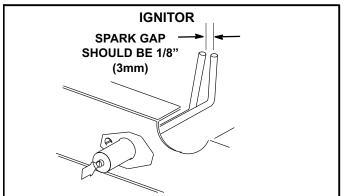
TABLE 26 IGNITOR AND SENSOR POSITION
